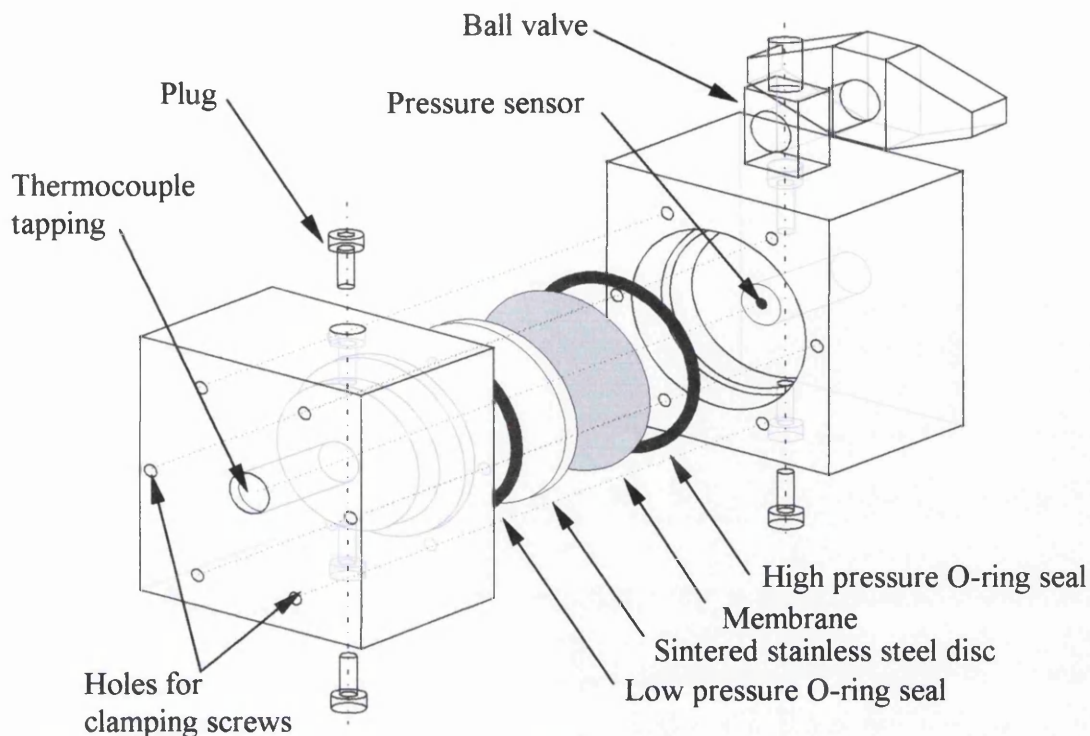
Three-dimensional partially exploded view of the osmometer used for osmotic pressure measurement.
